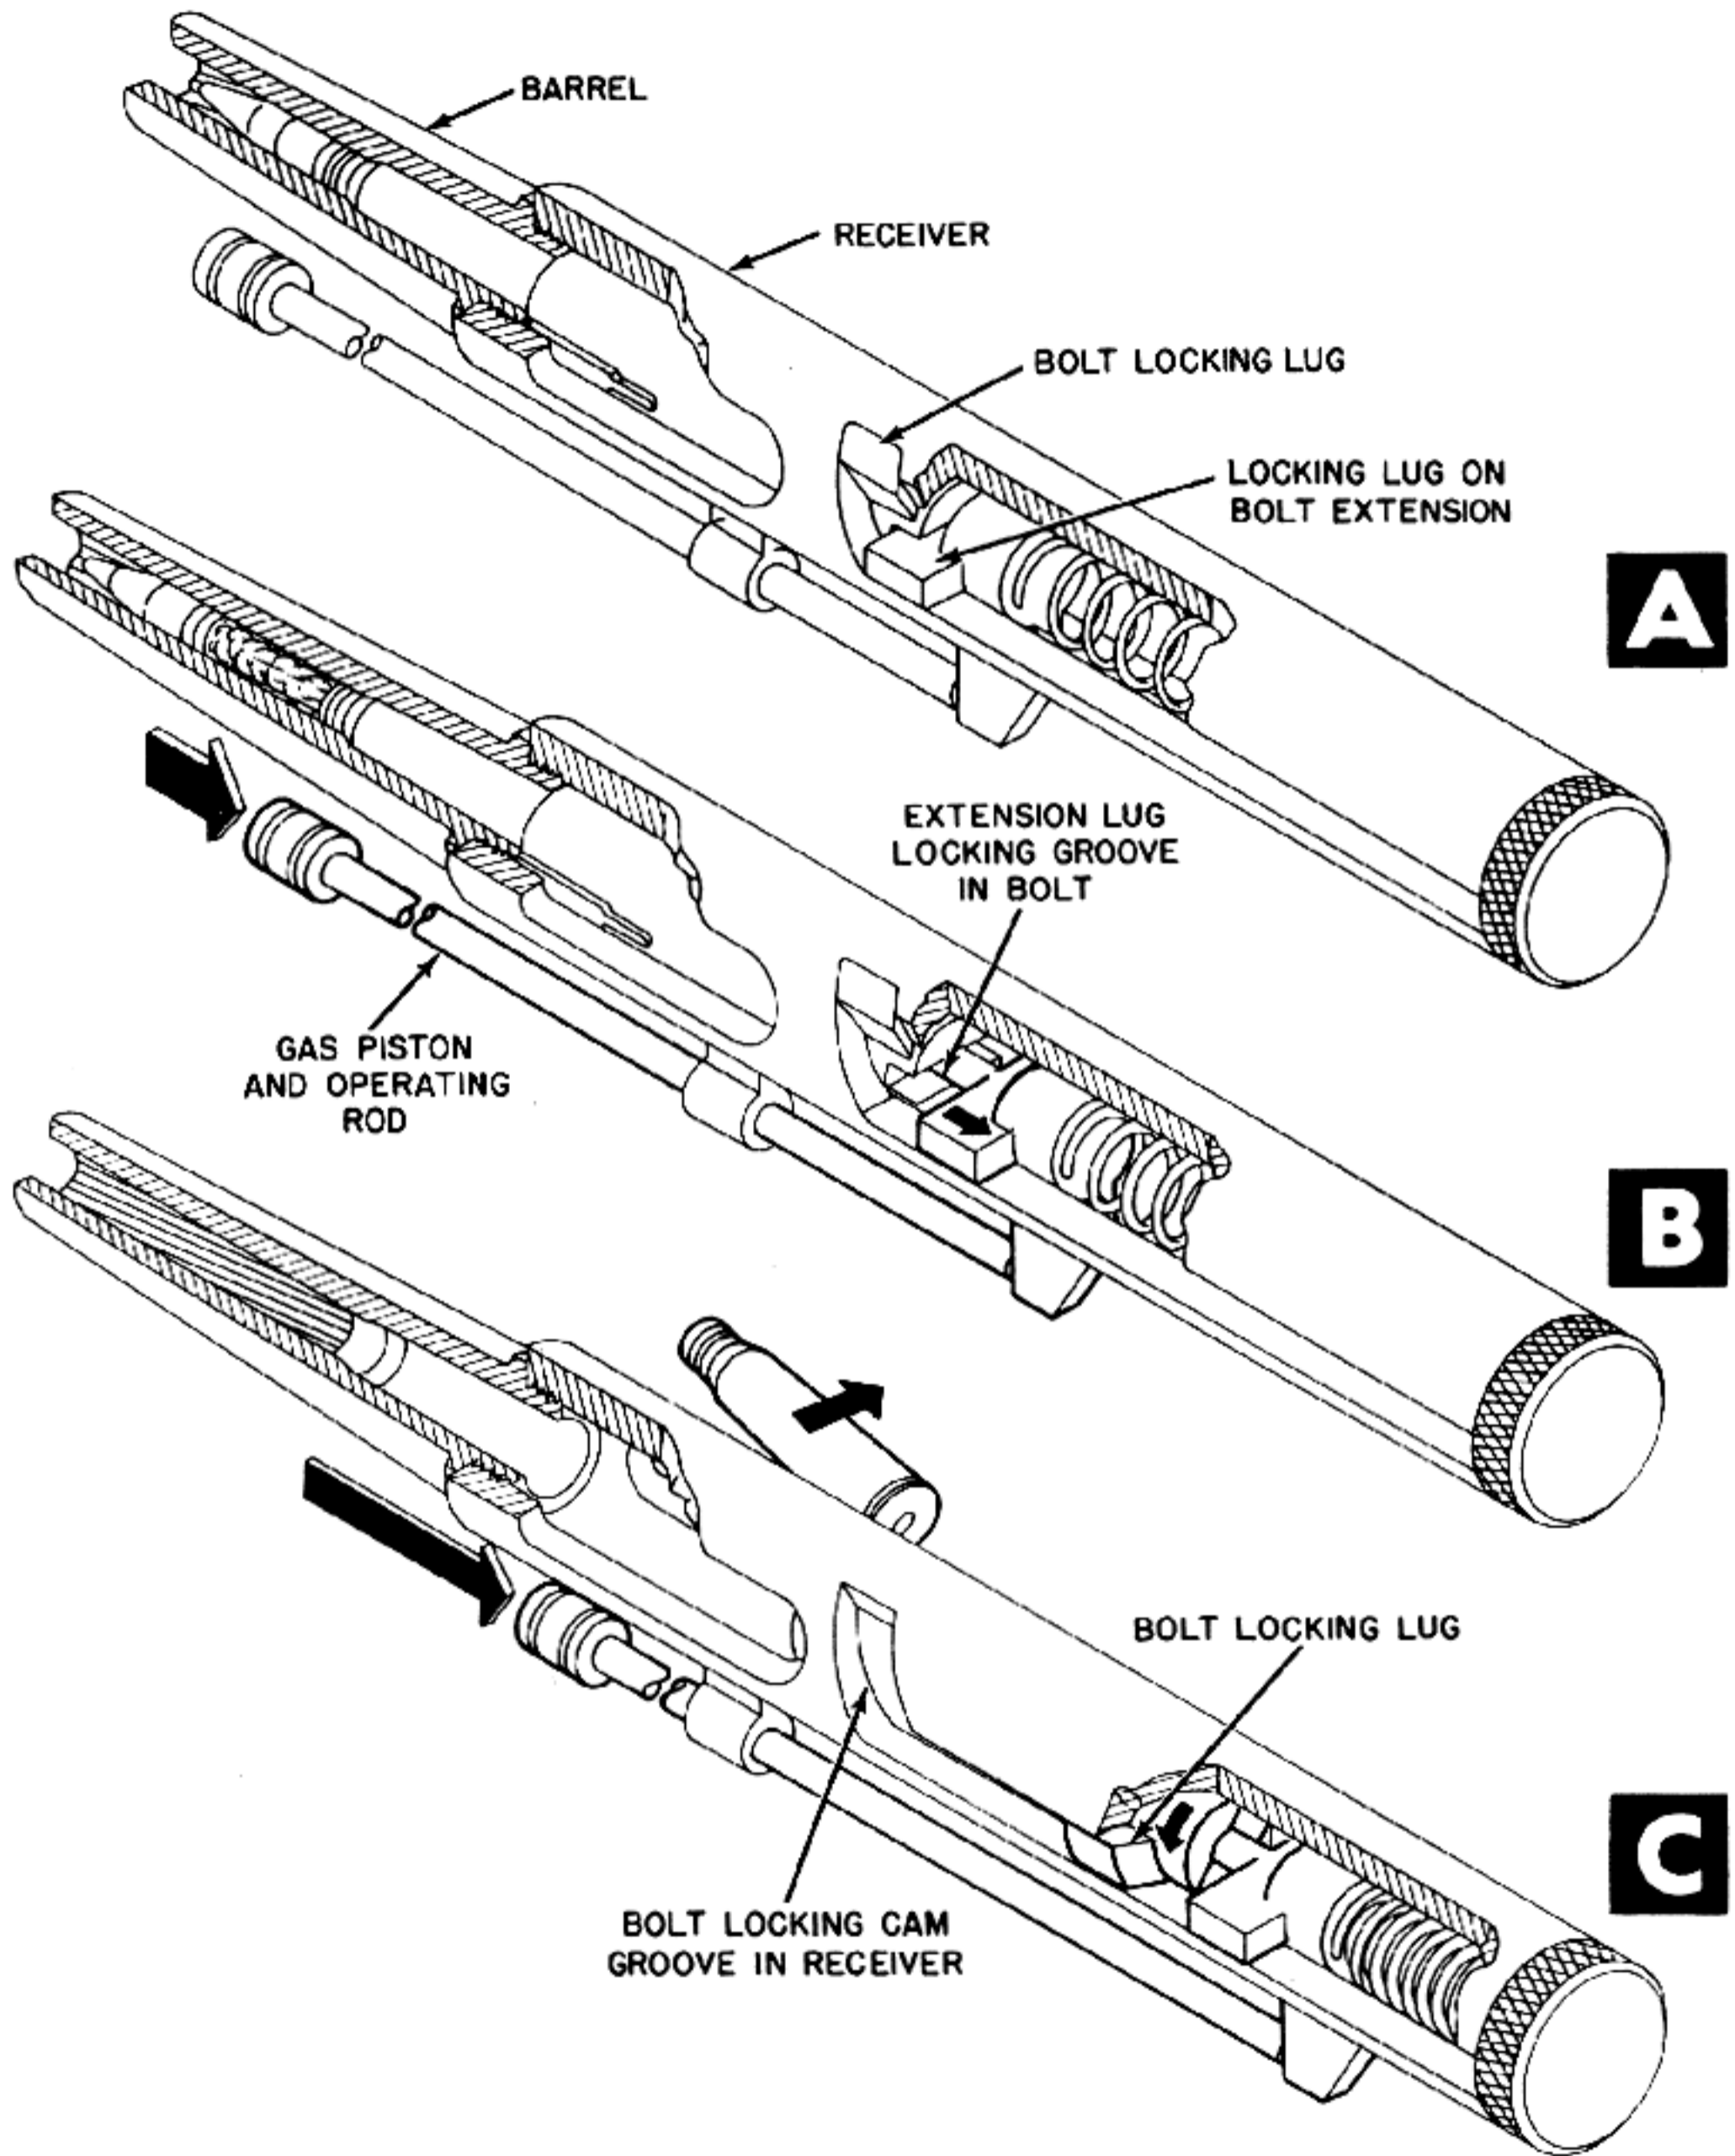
Gas Piston Actuates Locking Lug on Bolt Extension. Gas Pressure Then Unlocks Bolt.
